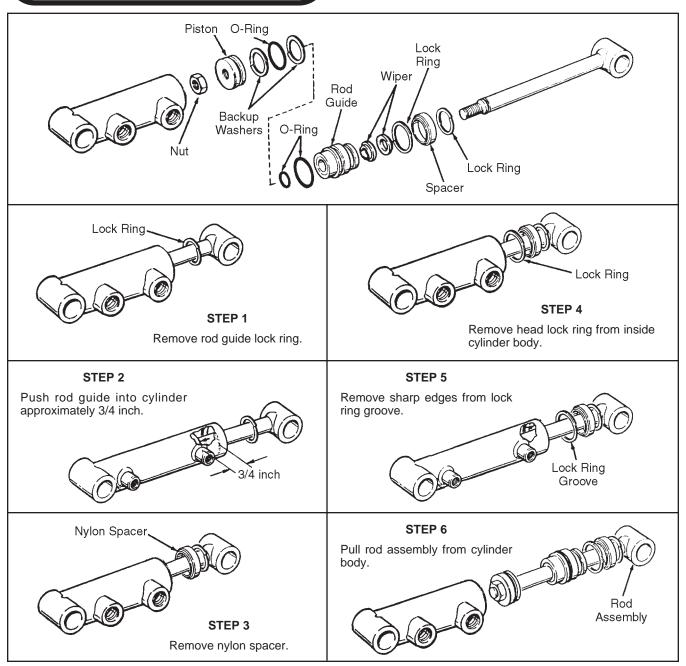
M-1. Center, Right and Left Rear Lift Cylinder Disassembly
